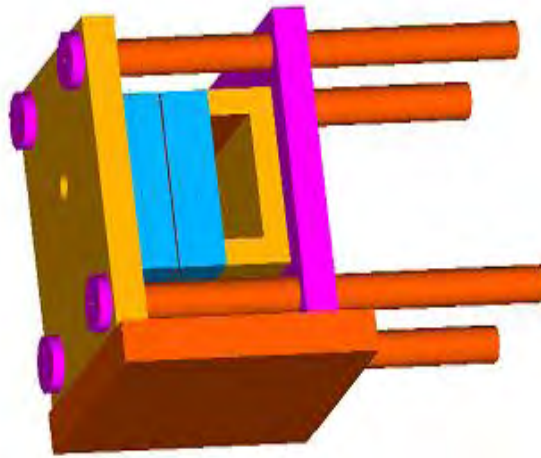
B: Close Up of Machine Base And Die Casting Machine
